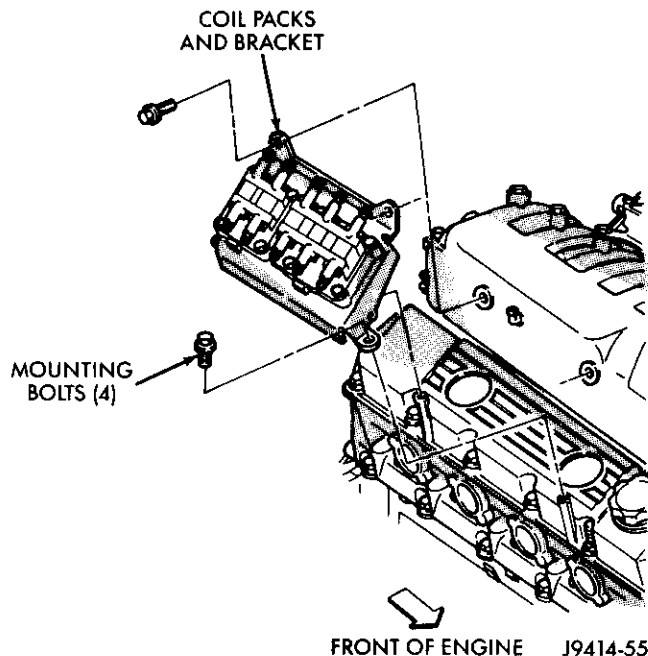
Ignition Coil Pack and Mounting Bracket—8.0L V-10 Engine
